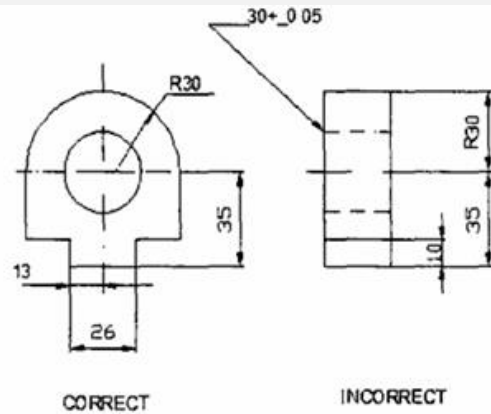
Placing the Dimensions where the Shape is Best Shown
